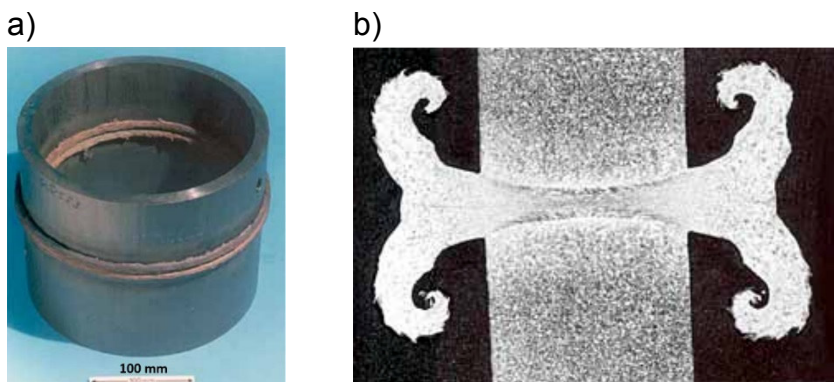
a) Rotary friction weld in Ti-6Al 4V-0.5Pd pipe and b) Macro section through rotary friction weld in Ti-6Al-4V-0.5Pd pipe [97].
